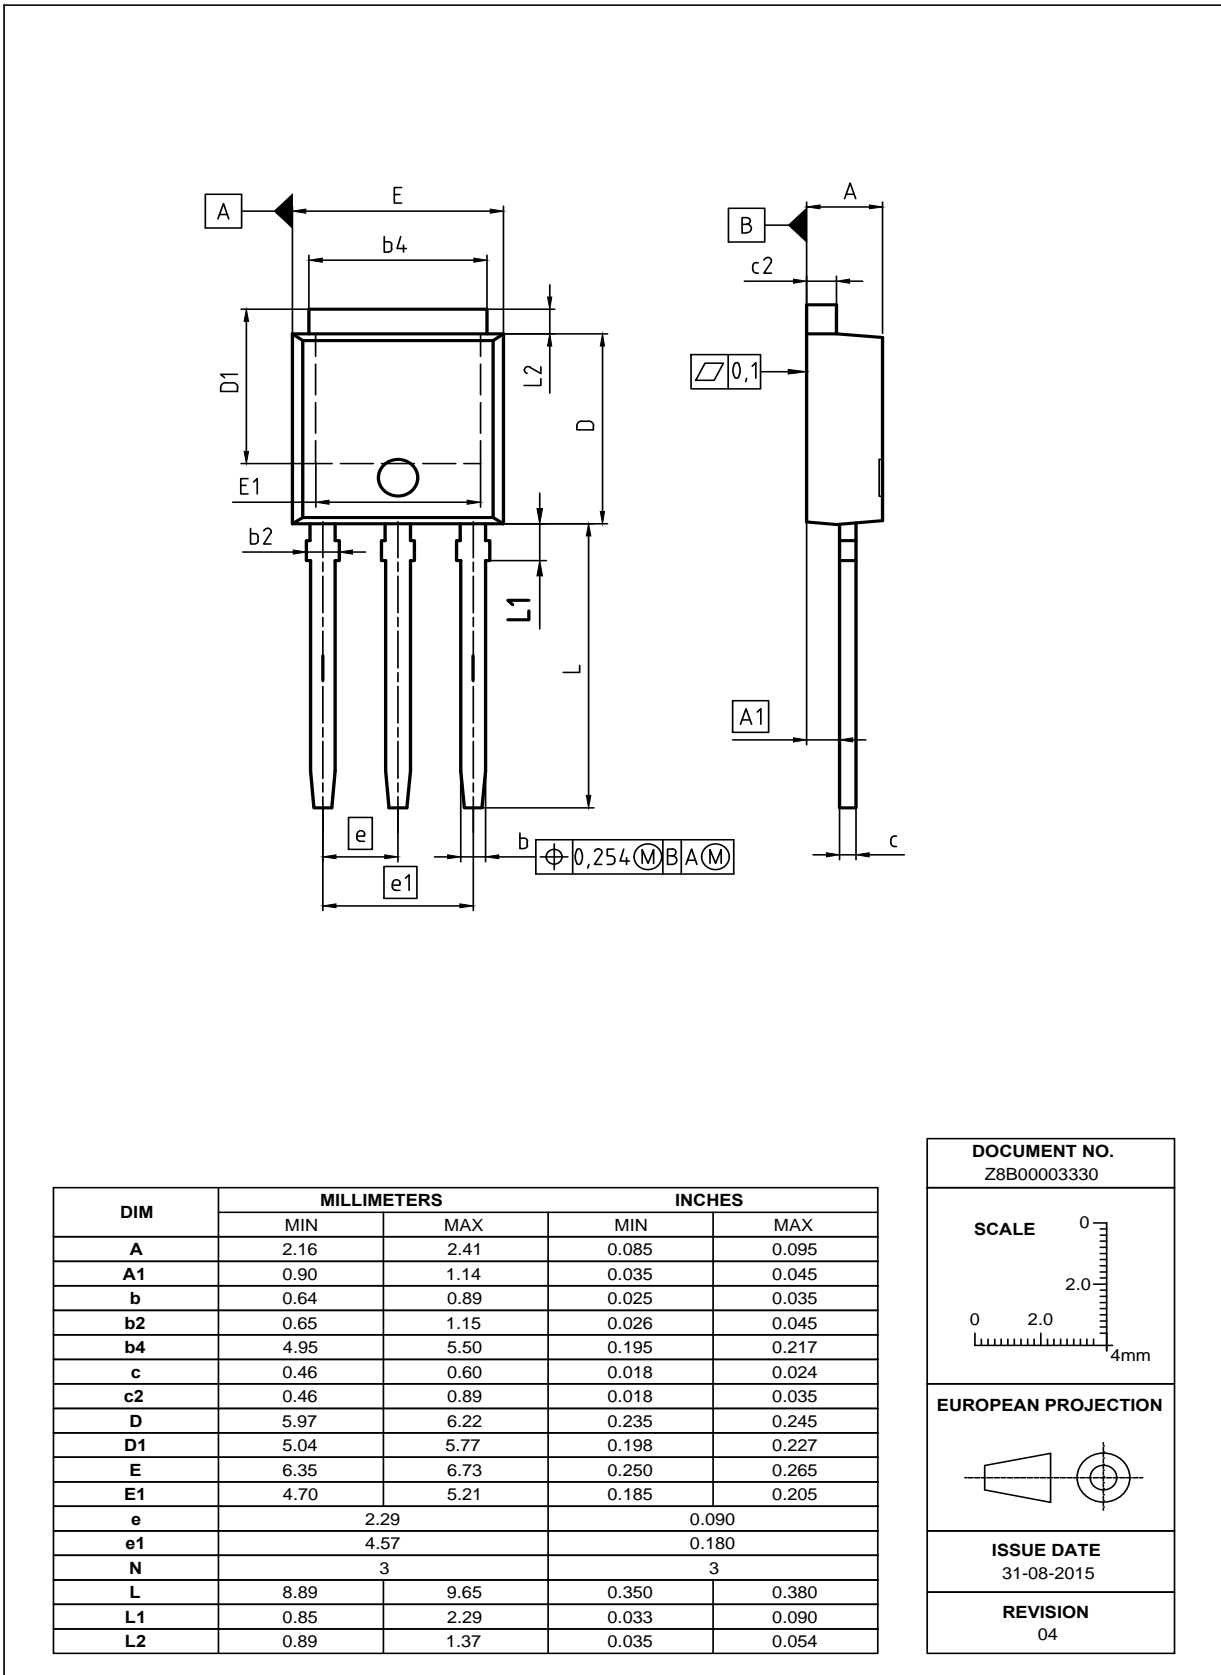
Outline PG-TO 251, dimensions in mm/inches
